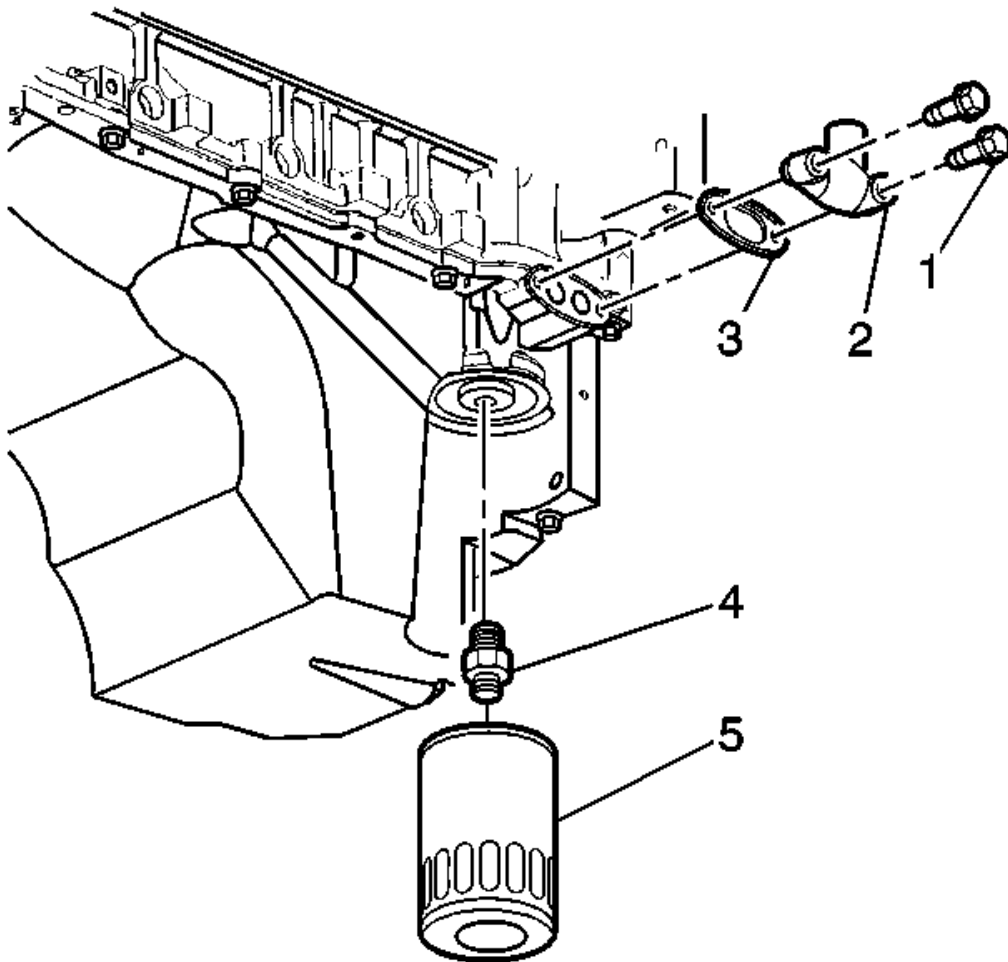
Oil Pan Cover Bolts, Cover, And Gasket
